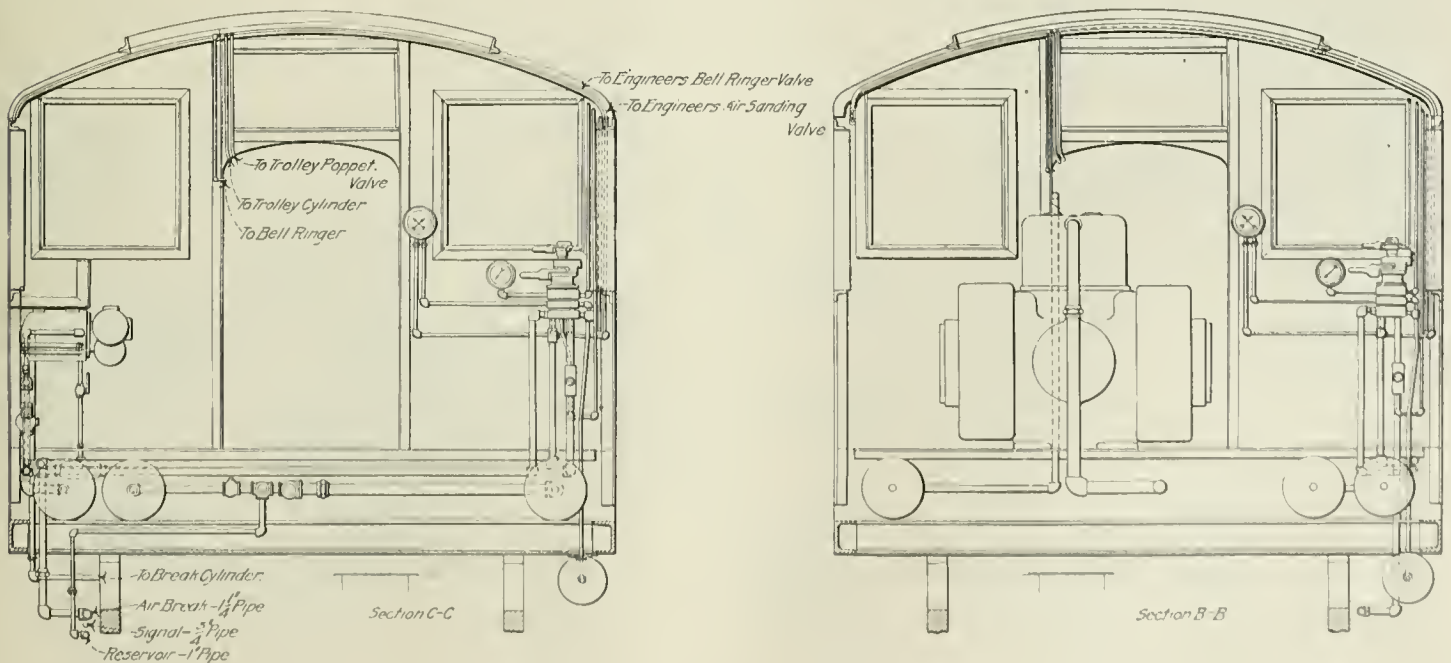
Air Brake and Auxiliary Piping; End Views.
